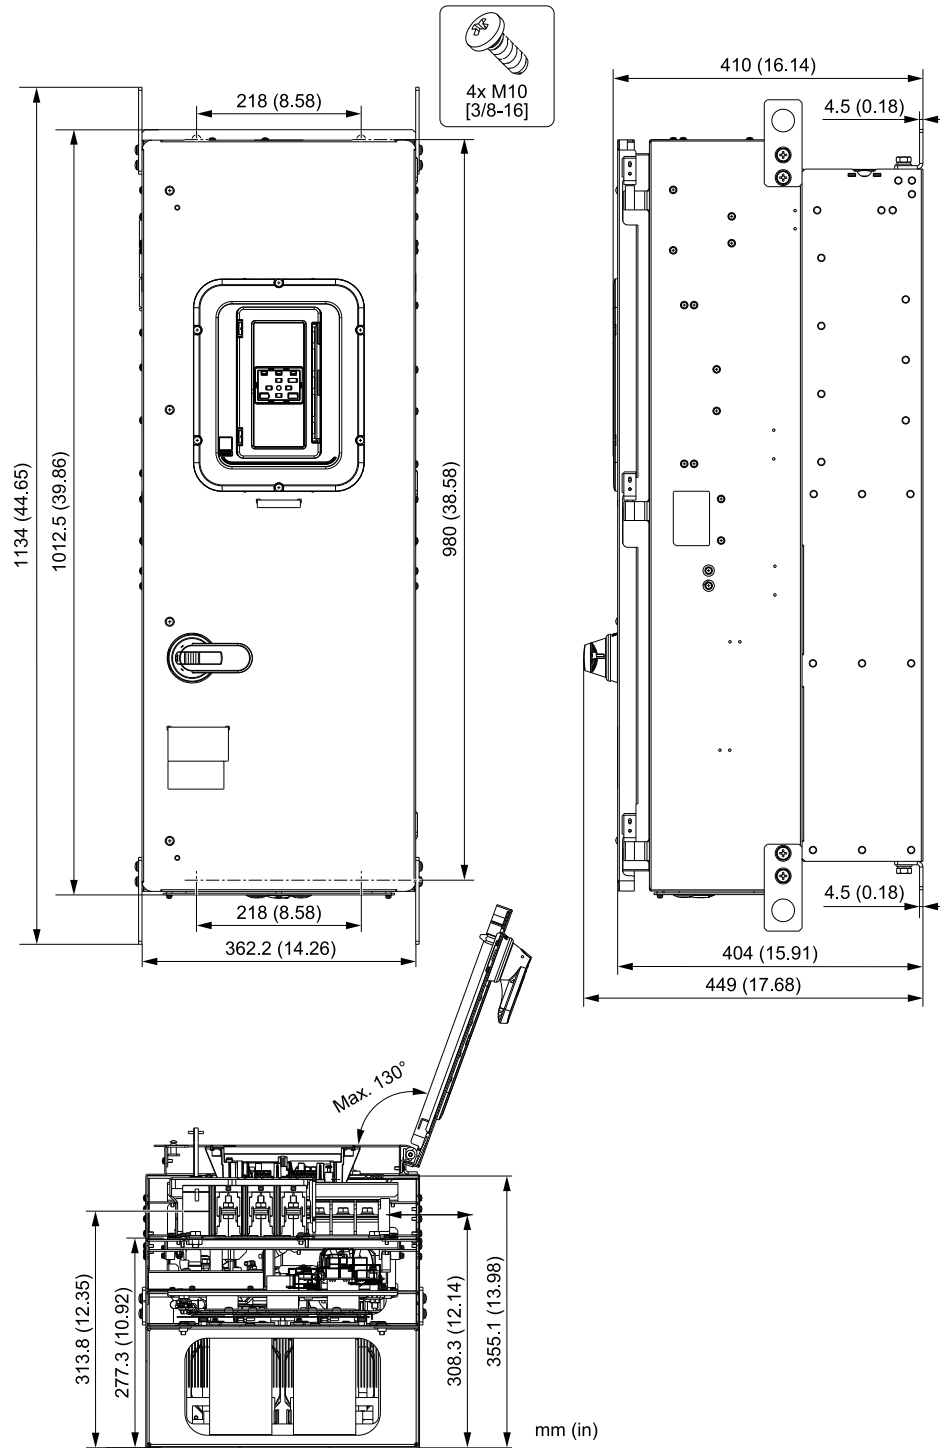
Exterior and Mounting Dimensions Diagram 7
